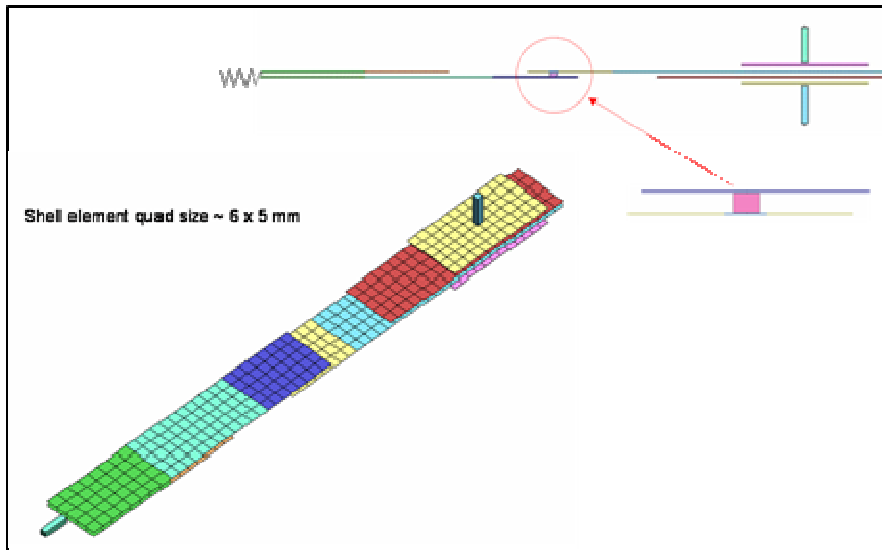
Lap shear engineering scale model, connection modelled with discrete beam
